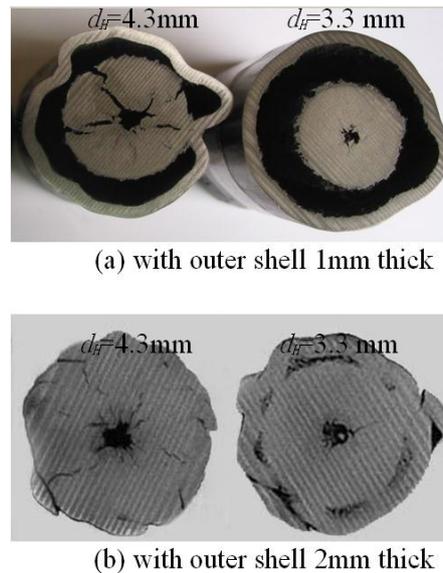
Sections of steel tube after sliding implosion by HE GH-925 with an shield shell (d_H --HE thickness)
